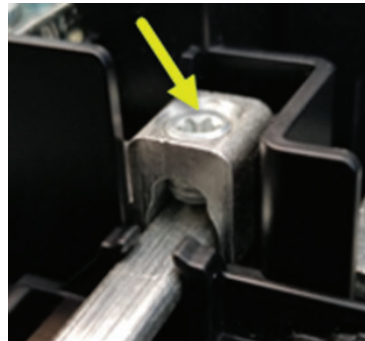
Apply Mark after Tightening Left Bottom Neutral Bar Screw
